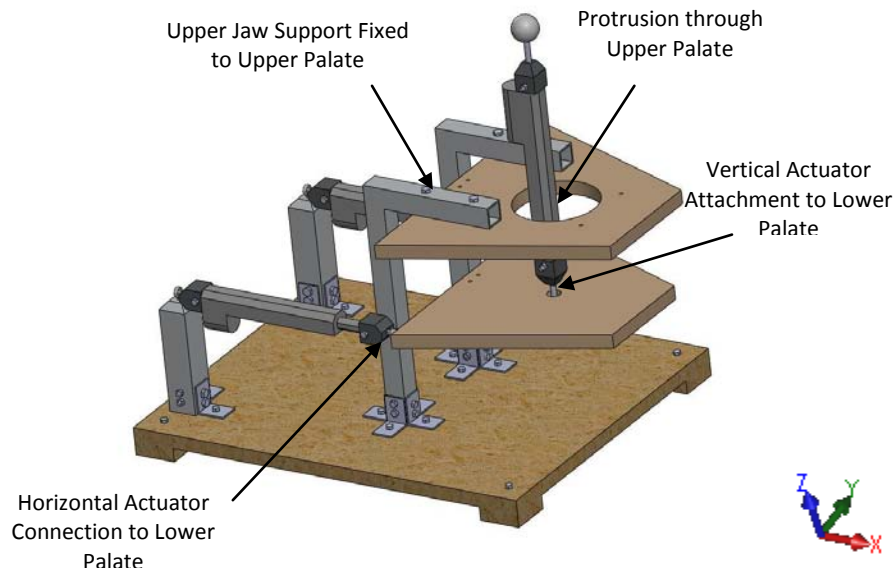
Attachment of the jaw palates to the structure and linear actuator attachments to the lower jaw.
